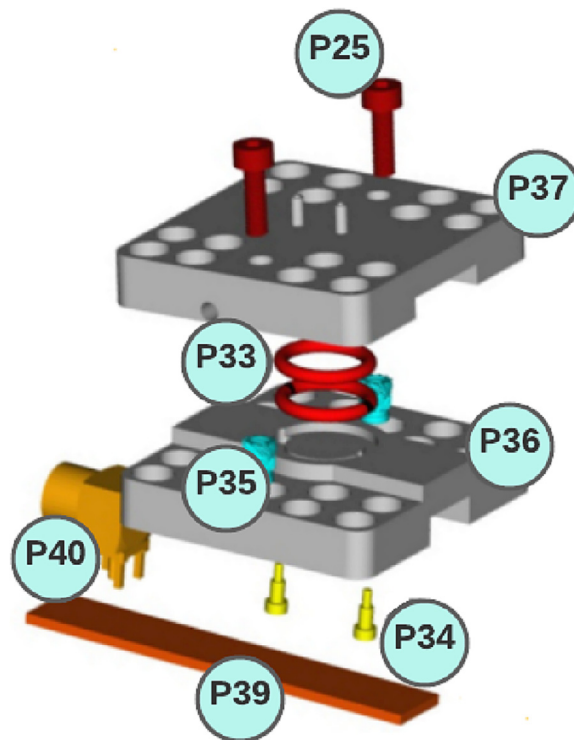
Exploded view of the sensor case. The parts are detailed in Section 4 (Bill of materials).
